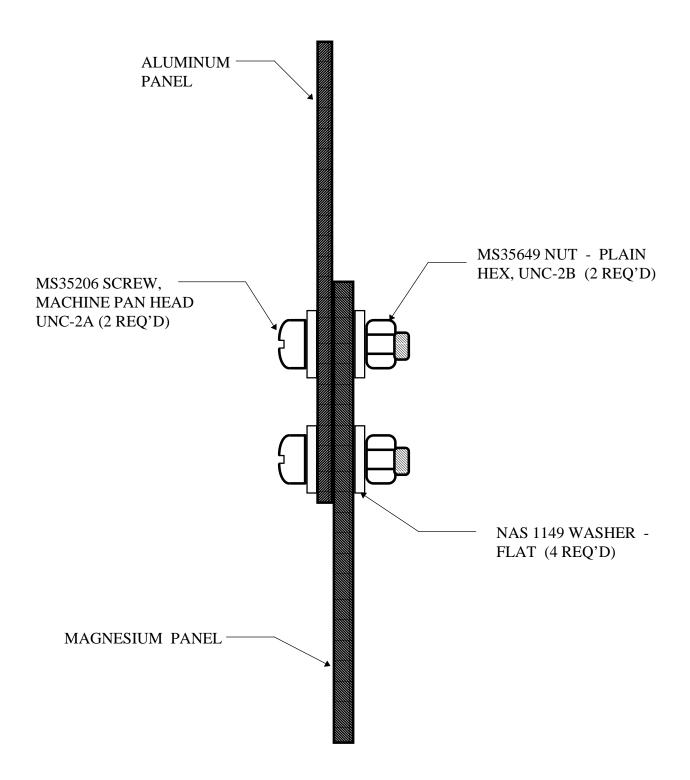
DIMENSIONS FOR DISSIMILAR METAL TEST PANELS
